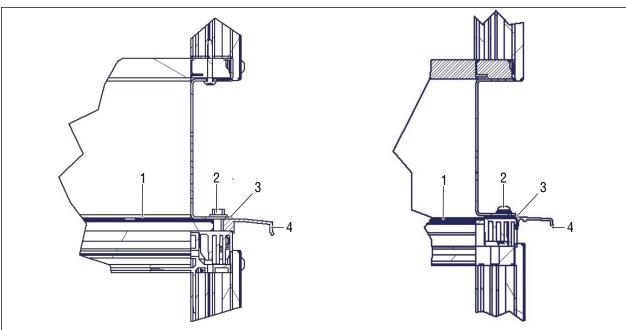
Unit arrangement roof assembly with unit frame profile (left) and without unit frame profile (right)
